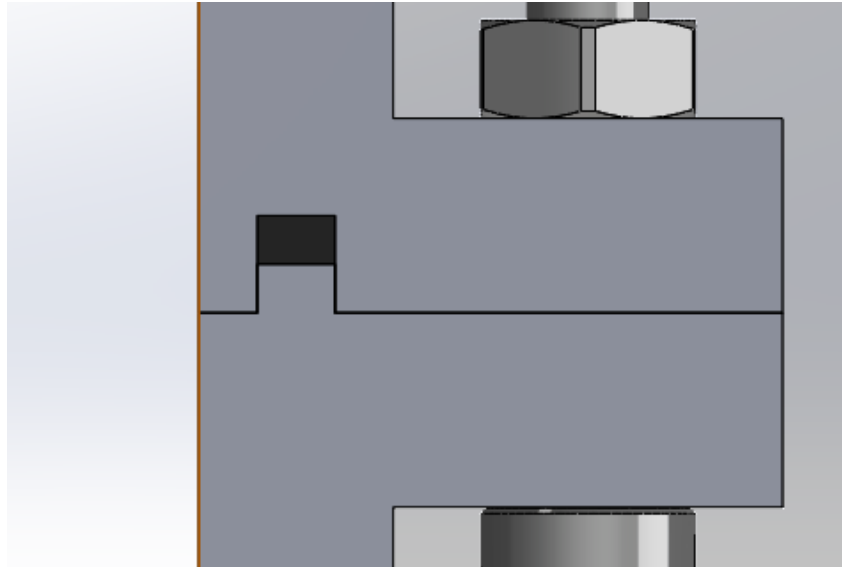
Close up view of the connection between the two 3D printed surround pieces with a slot for O-ring chord stock.
